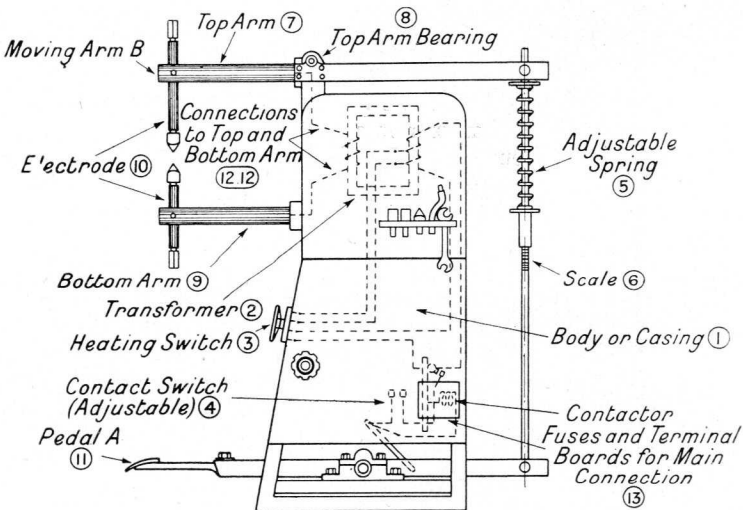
Diagram of spot welder showing method of operation.
